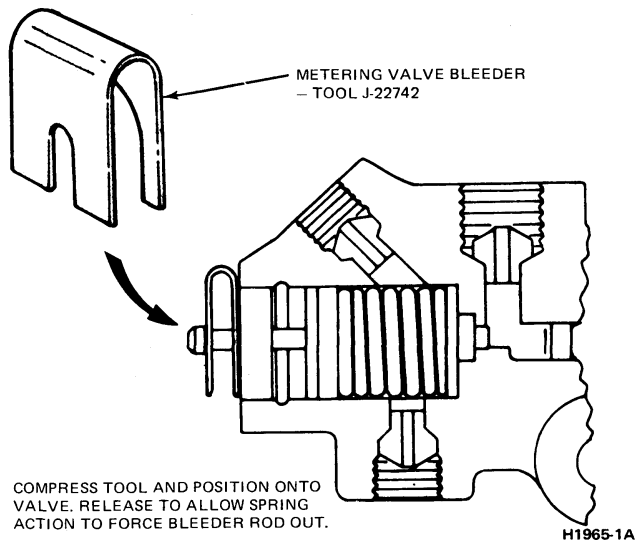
Pressure Bleeding Tool—Sliding Caliper—Disc Brakes
